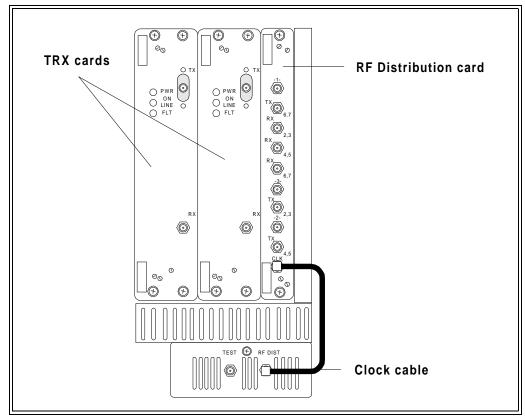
Clock module semi-rigid cable layout (only the clock cable is shown above)
